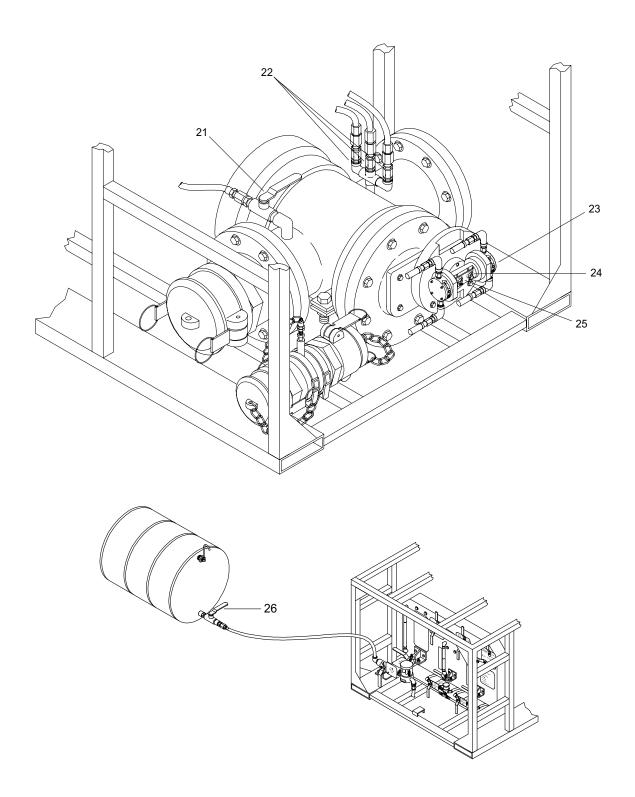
Fuel Additive Injector Assembly Controls and Indicators (Sheet 2 of 3).
